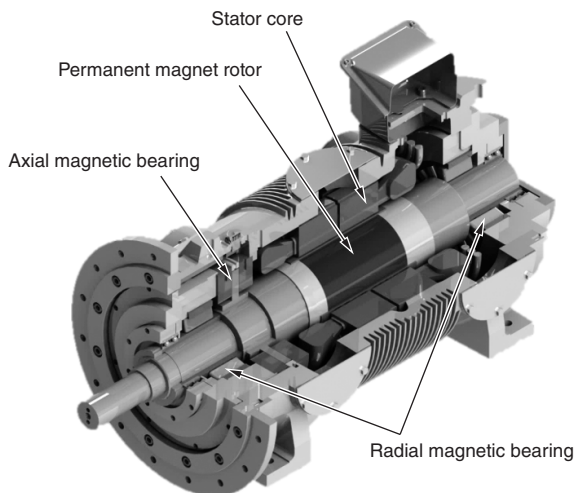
Cross-Sectional Configuration of Prototype of High-Speed PM Motor
